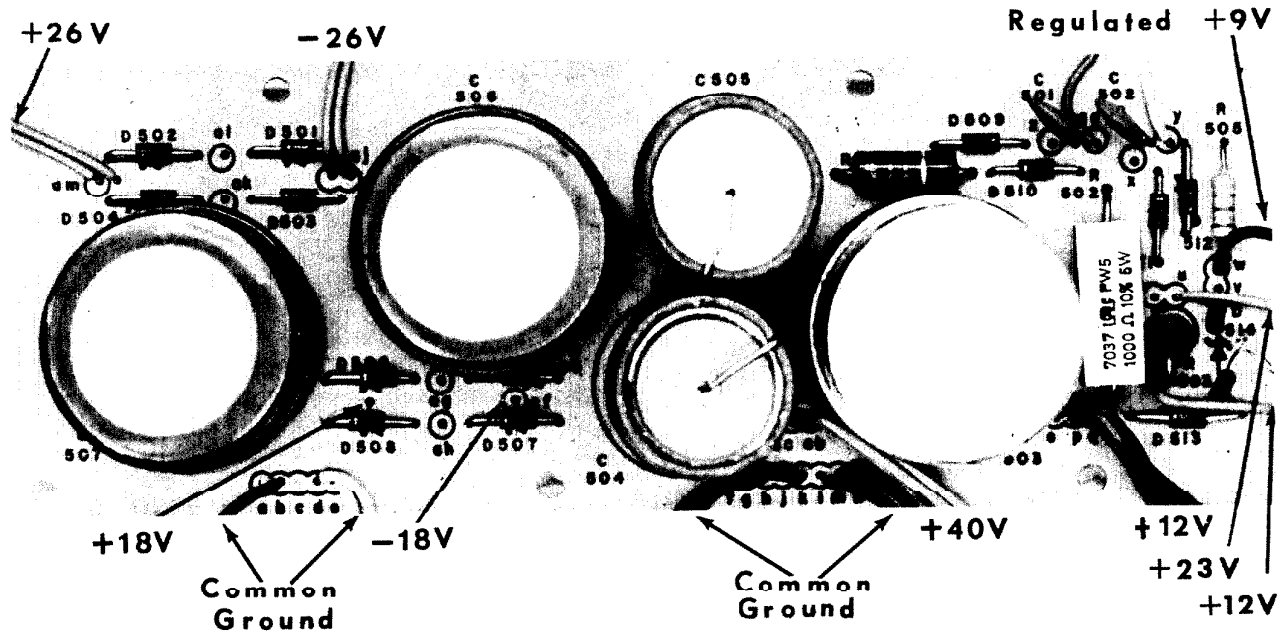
TOP VIEW OF POWER SUPPLY PC ASSEMBLY
